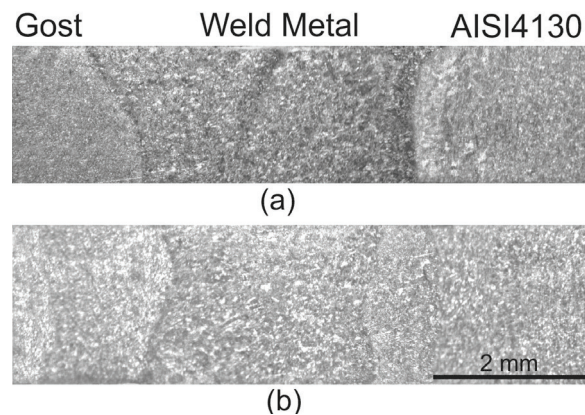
Macrostructure of samples welded with: (a) ER100S-G and (b) ER410NiMo filler metals.
